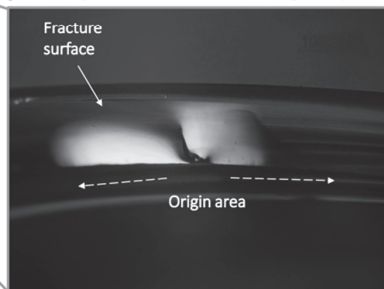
OM image of the fracture surface, bottom, sample 001_6, 10x magnification
